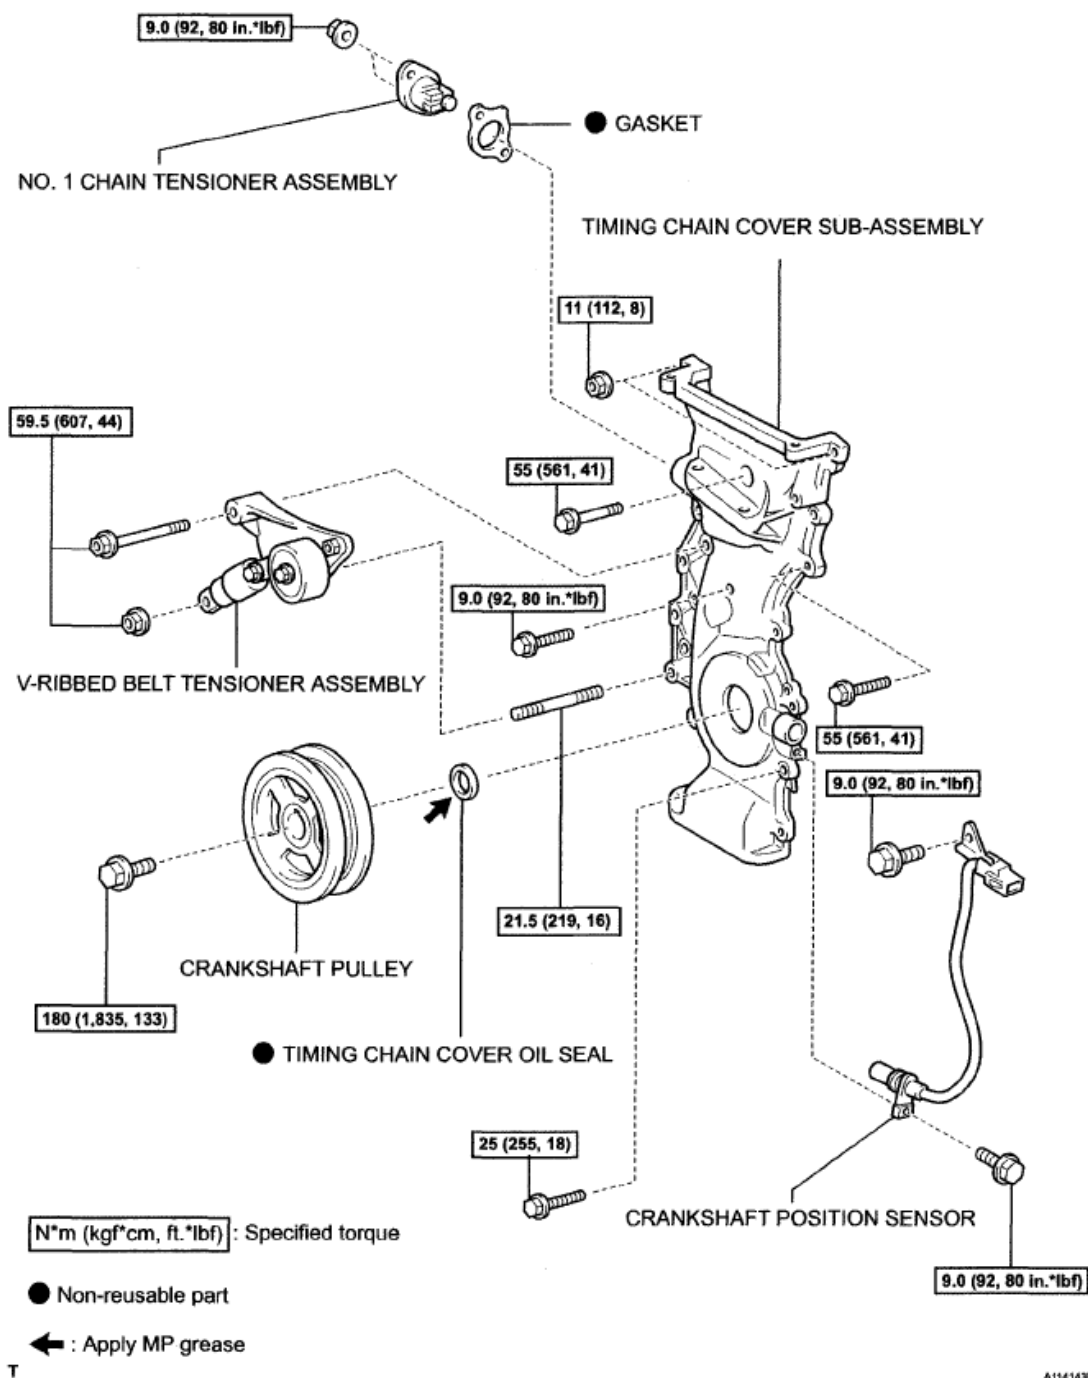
Identifying Cylinder Head Components With Specification (9 Of 13)
